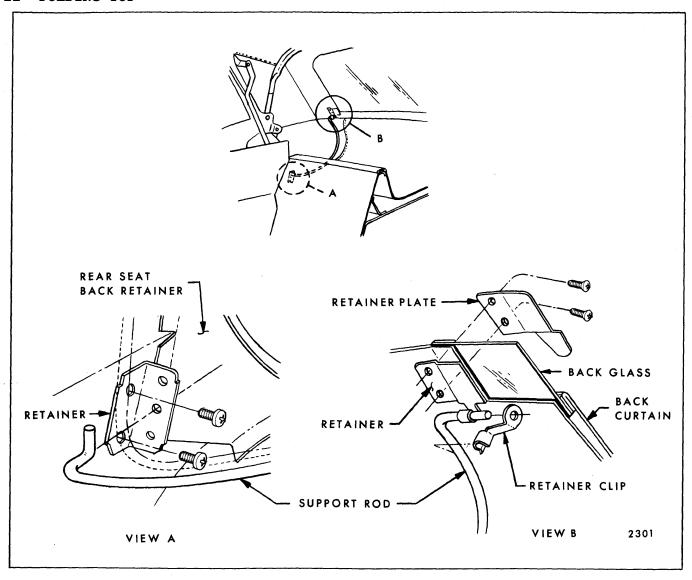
"B & C" Body Back Glass Support Rod Attachments
